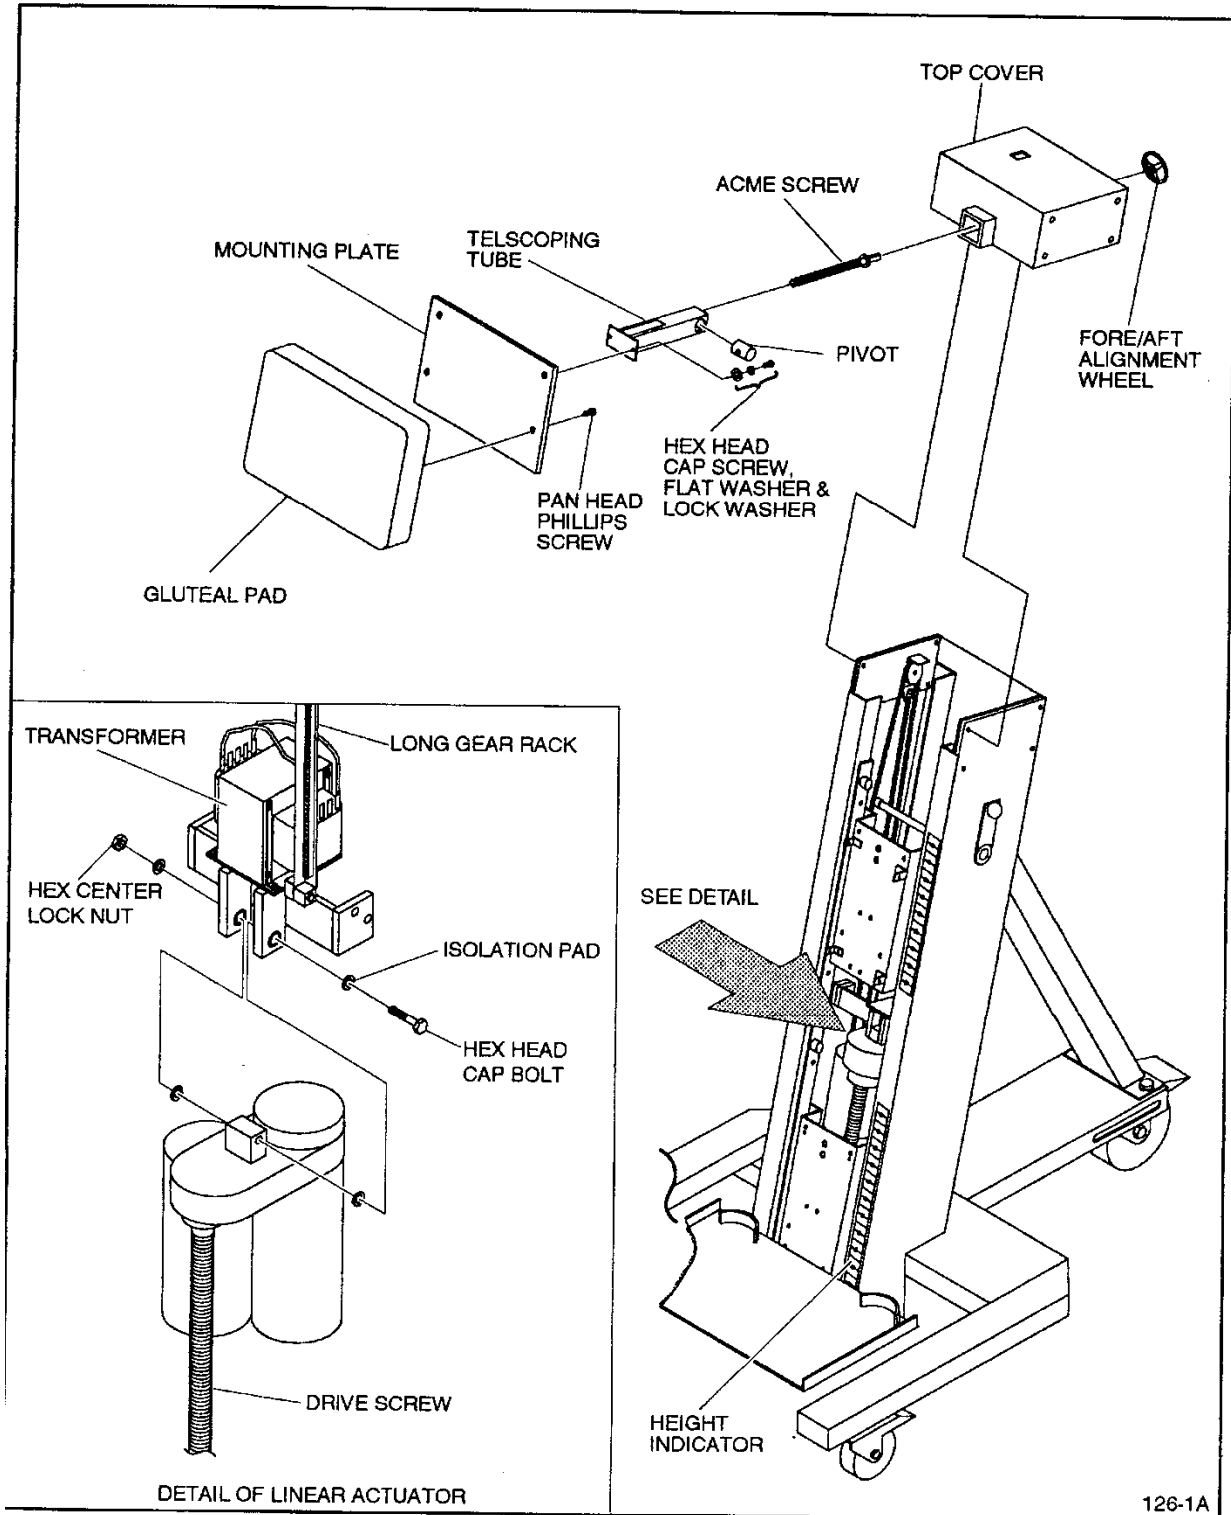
Gluteal Pad and Linear Actuator Replacement
